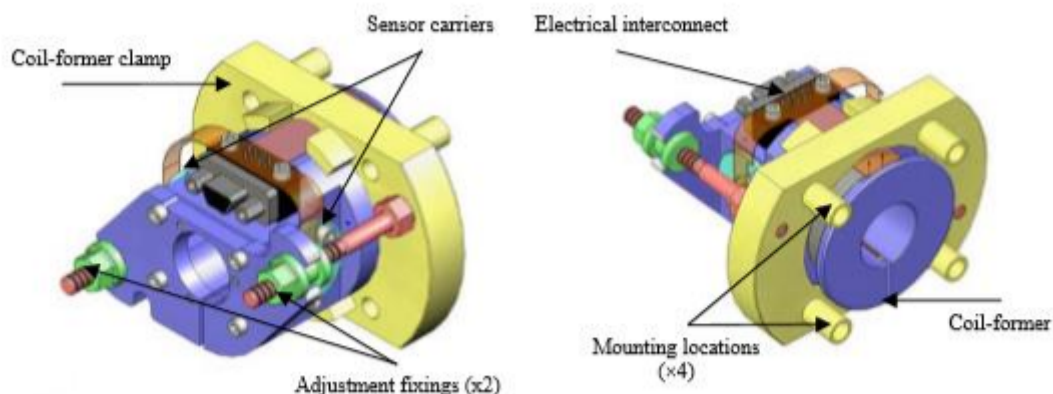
3D CAD model of BOSEM assembly. (Left) Rear isometric view. (Right) Front isometric view.
